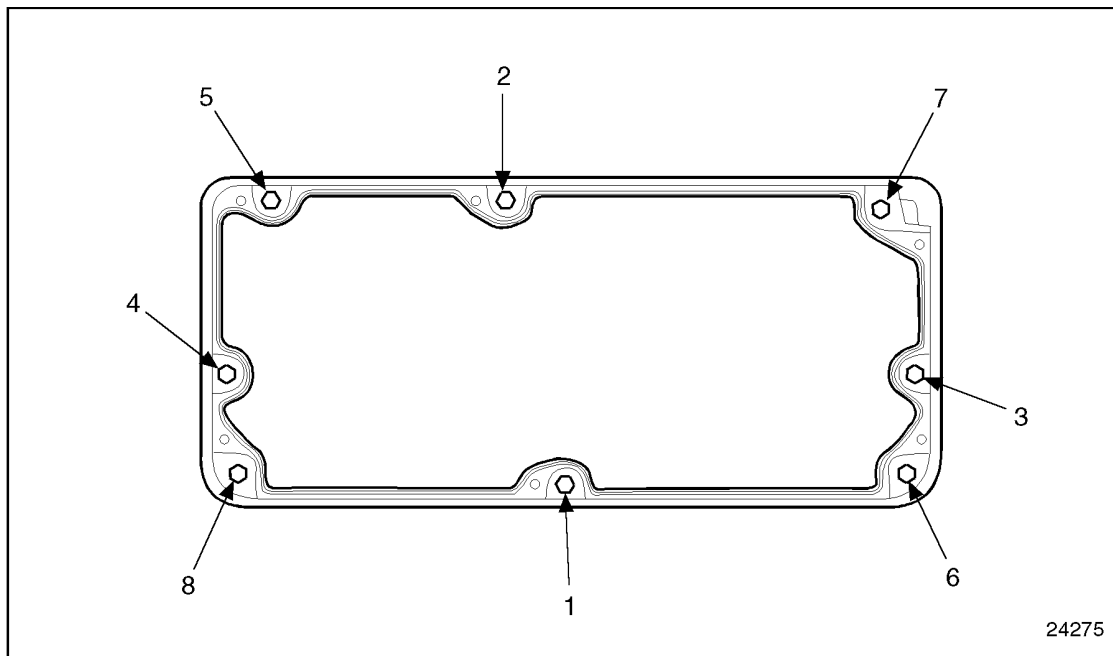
Rocker Cover Base Bolt Tightening Sequence
